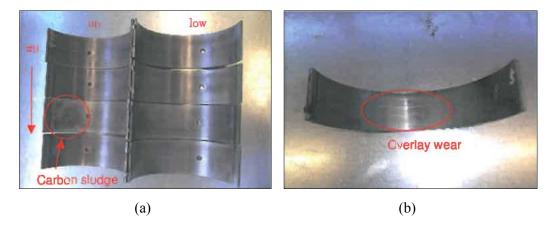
Carbon sludge on bearing inner surfaces. Picture (a) shows the inner surfaces of the connecting rod bearings of cylinder #9-12. Picture (b) shows the inner surface of the main bearing of cylinder #5. Courtesy of [25]
